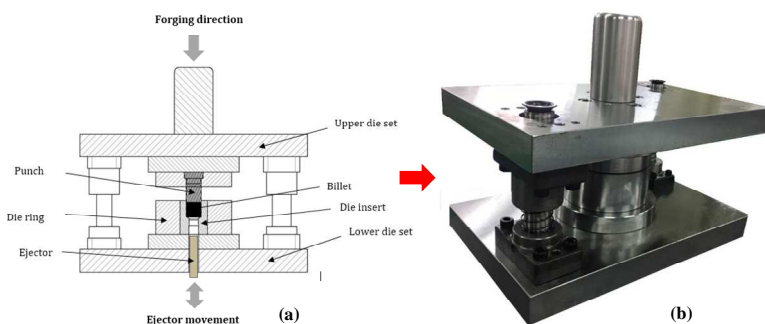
Die Set Assemble (a) CAD Model and (b) Completed Die Set
